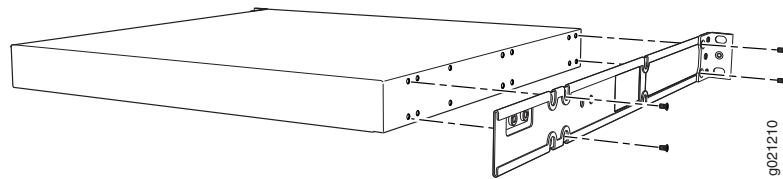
Attaching the Front-Mounting Bracket to the Side Mounting-Rail
